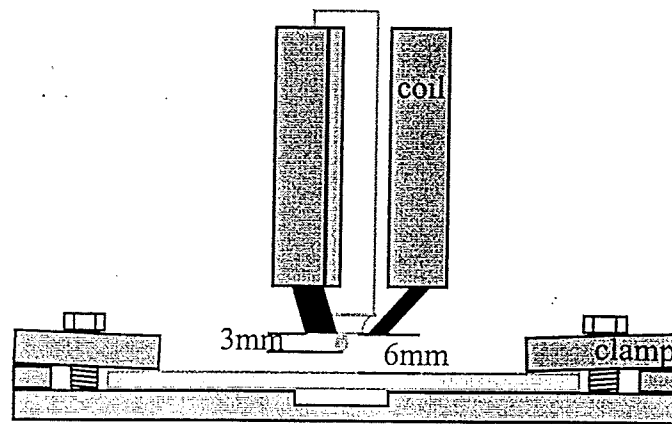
Schematic drawing of the experimental set-up (side view).
